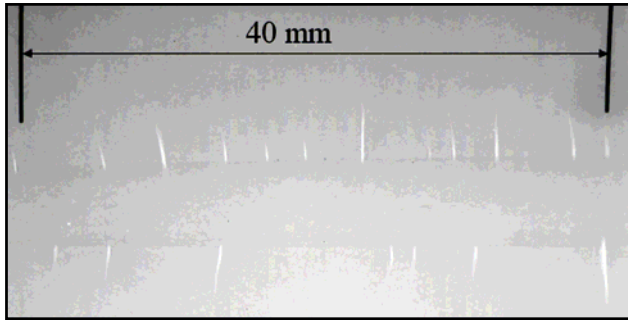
X-ray micro radiography image of the welded sheet, cracks are visible on the both sides perpendicular to weld-seam (white)
